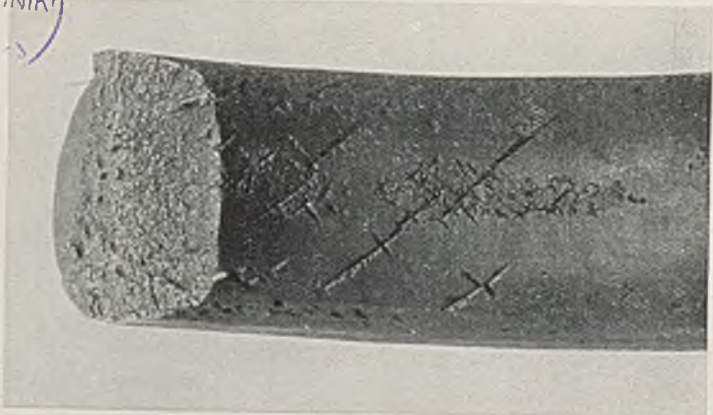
Double-Helicoidal Corrosion-Fatigue Cracks in a Spring.
